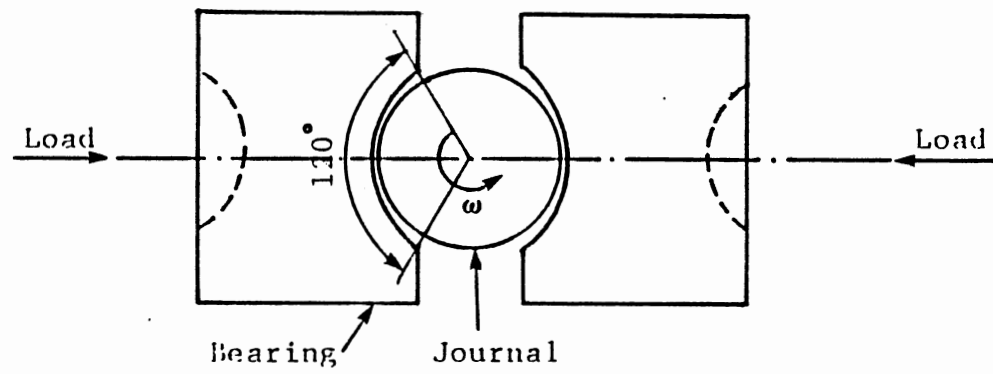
120° Bearing-Journal Assembly used in Thick Film Wear Test System
